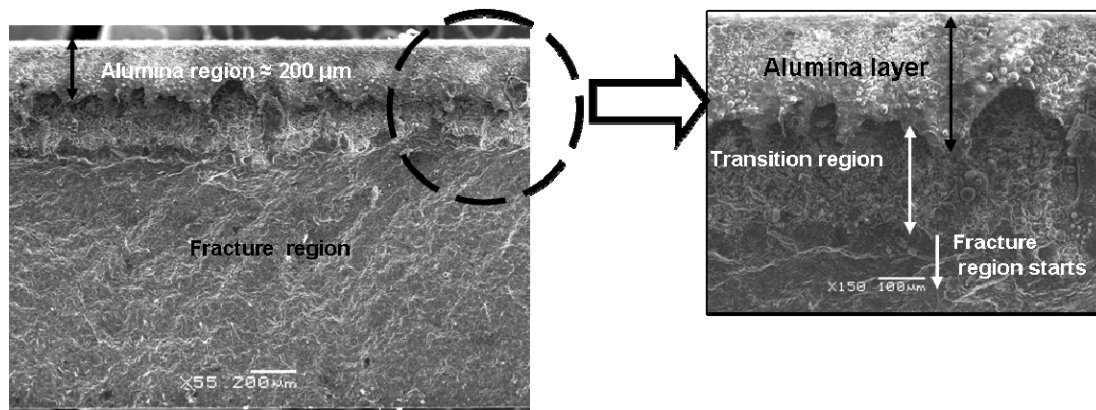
Single pass LWJ cut of 1.6mm thick CBN
